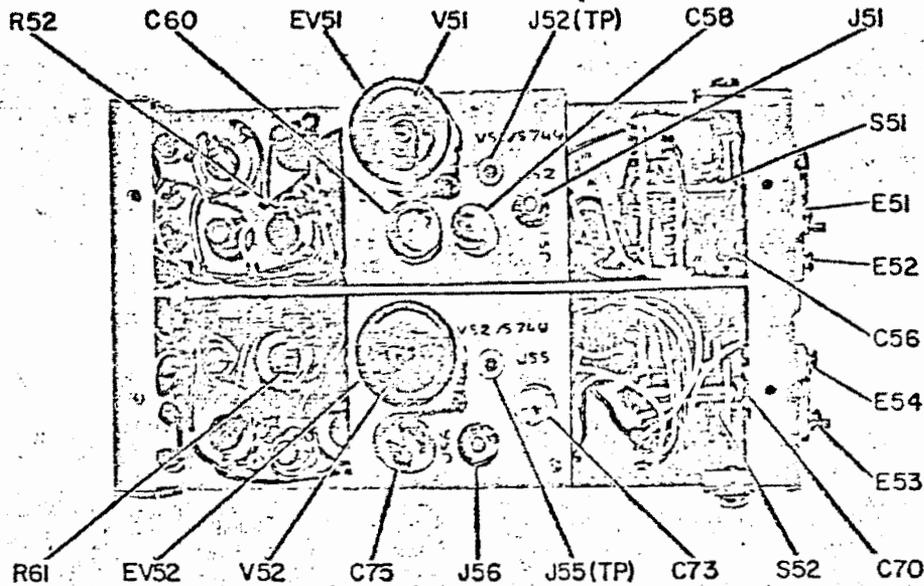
Preselector (R-F Subassembly), Top View, Location of Parts
